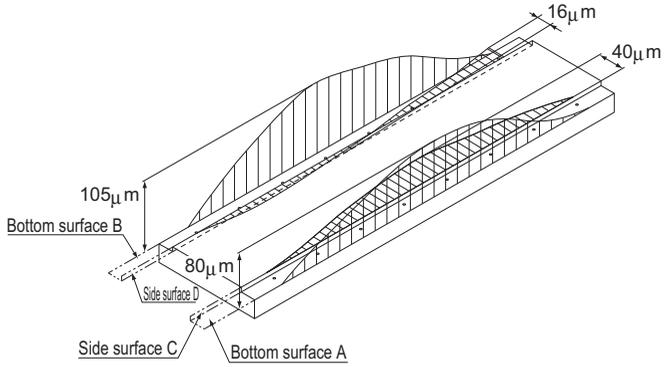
Surface Accuracy of the LM Guide Mounting Base (Milled Surface Only)
